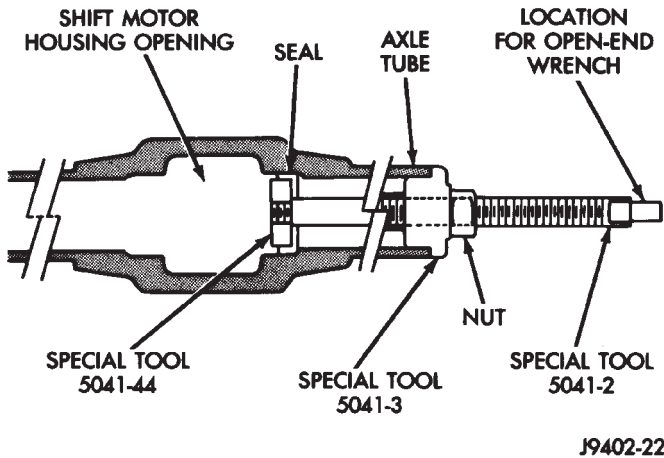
Inner Axle Seal Installation—216 FBI Axle
